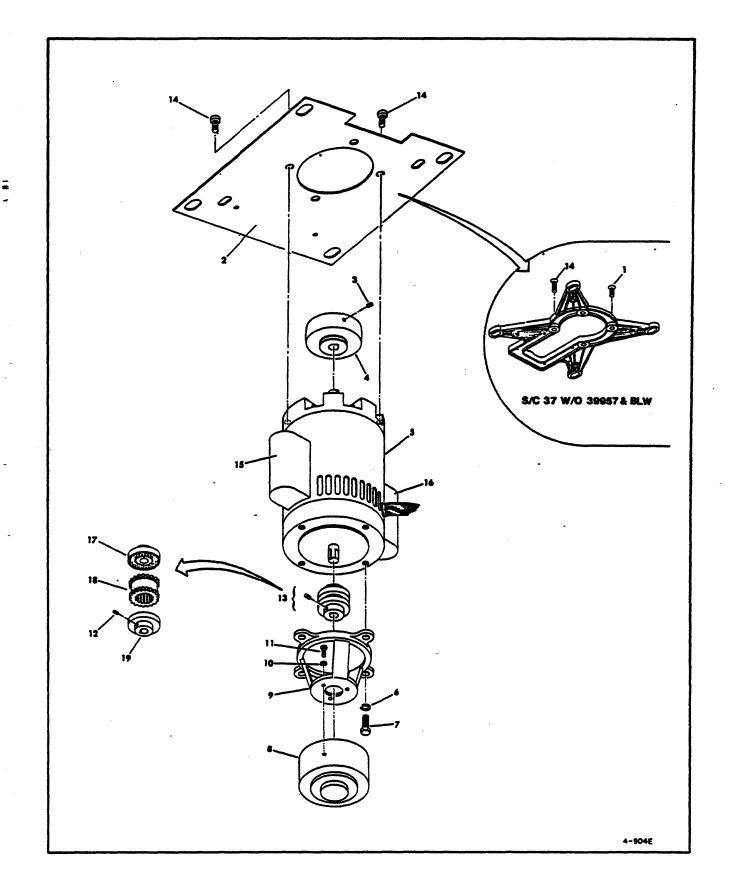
DRIVE MOTOR AND BRAKE ASSEMBLY
